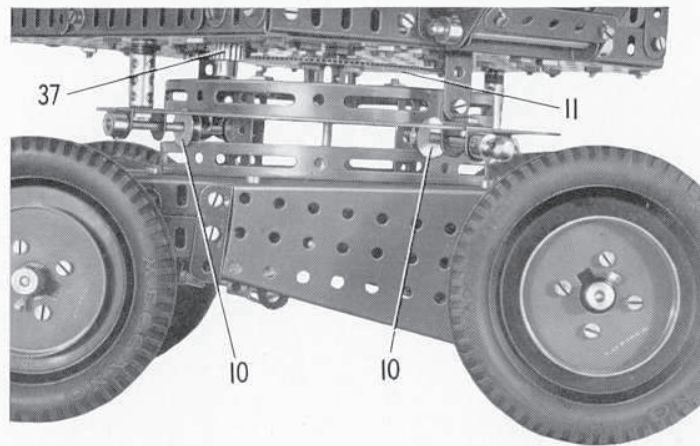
A close-up of the roller bearing unit mounted on the wheeled base
